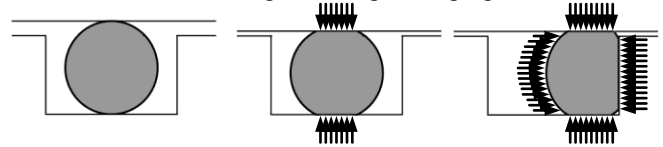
Loads on O-rings and groove. Left- No Squeeze (Uncompressed); Center- Initial Squeeze (Compressed); Right- Fluid Pressure & Squeeze
